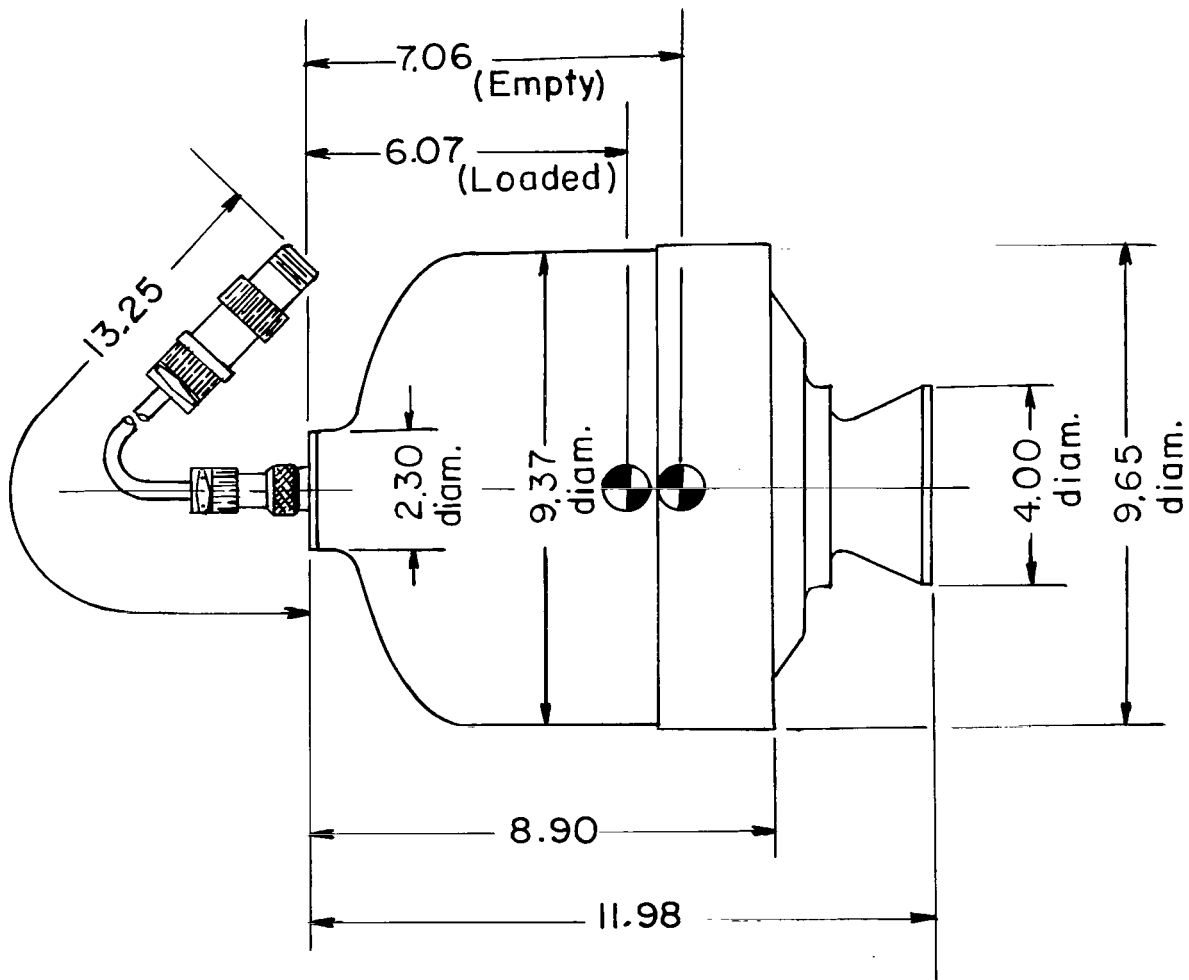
First-stage spin motor (Hotseat). All dimensions are in inches.
